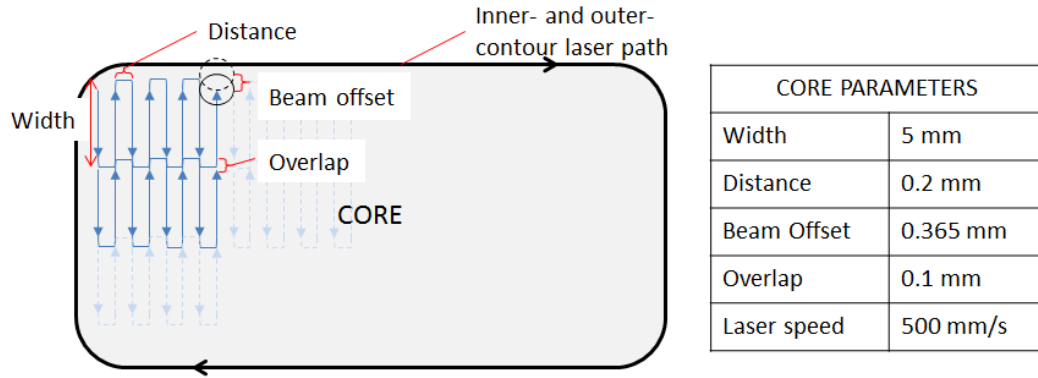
Sintering geometric surface paths for the samples manufactured with the *Solid Skin* sintering strategy with laser path indicated for the core (relative positions are indicated)
